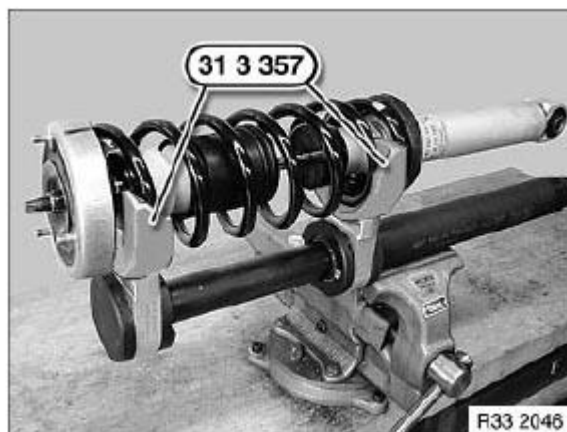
Compressing Coil Spring Using Special Tools (31 3 357)
